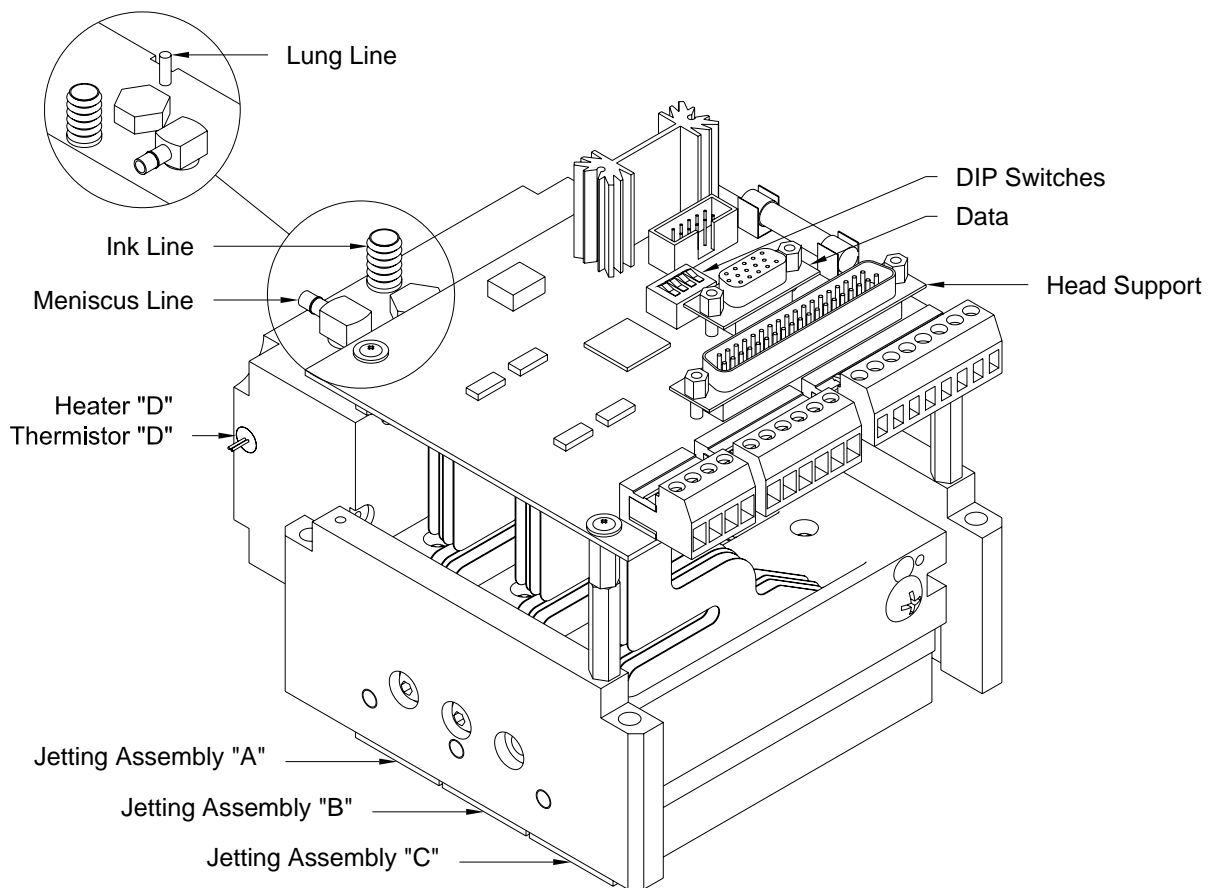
Manifold Assembly (2250 and 3250)
